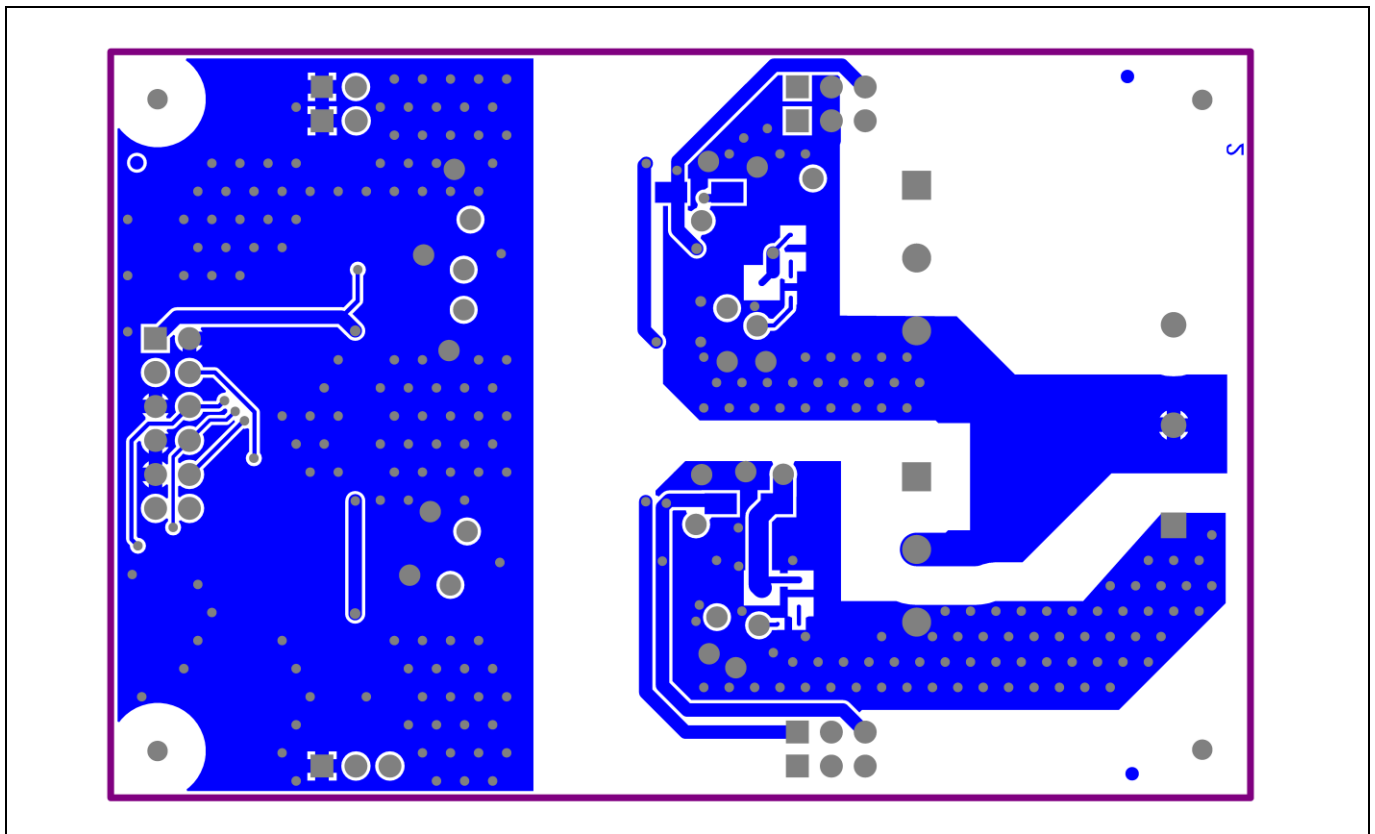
Eval-1ED3321MC12N – PCB bottom layer view
